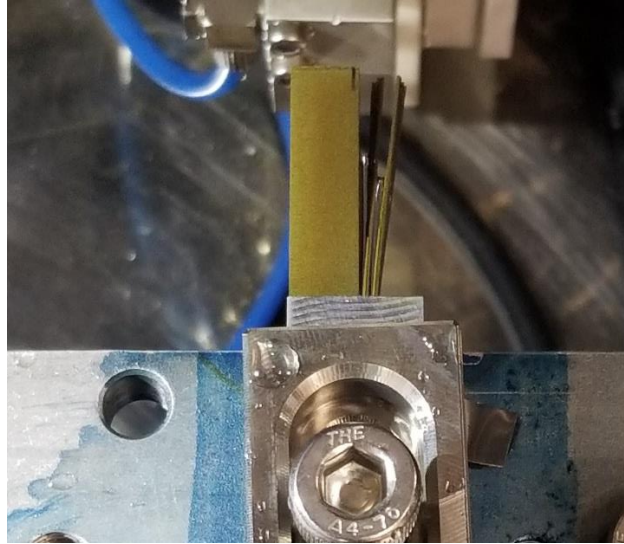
The manufacture failure due to the internal stress in wire EDM manufacturing.
